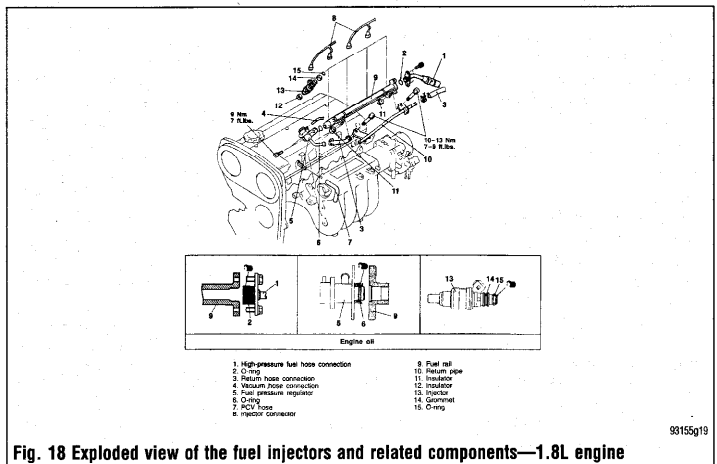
Exploded view of the fuel injectors and related components—1.8L engine
